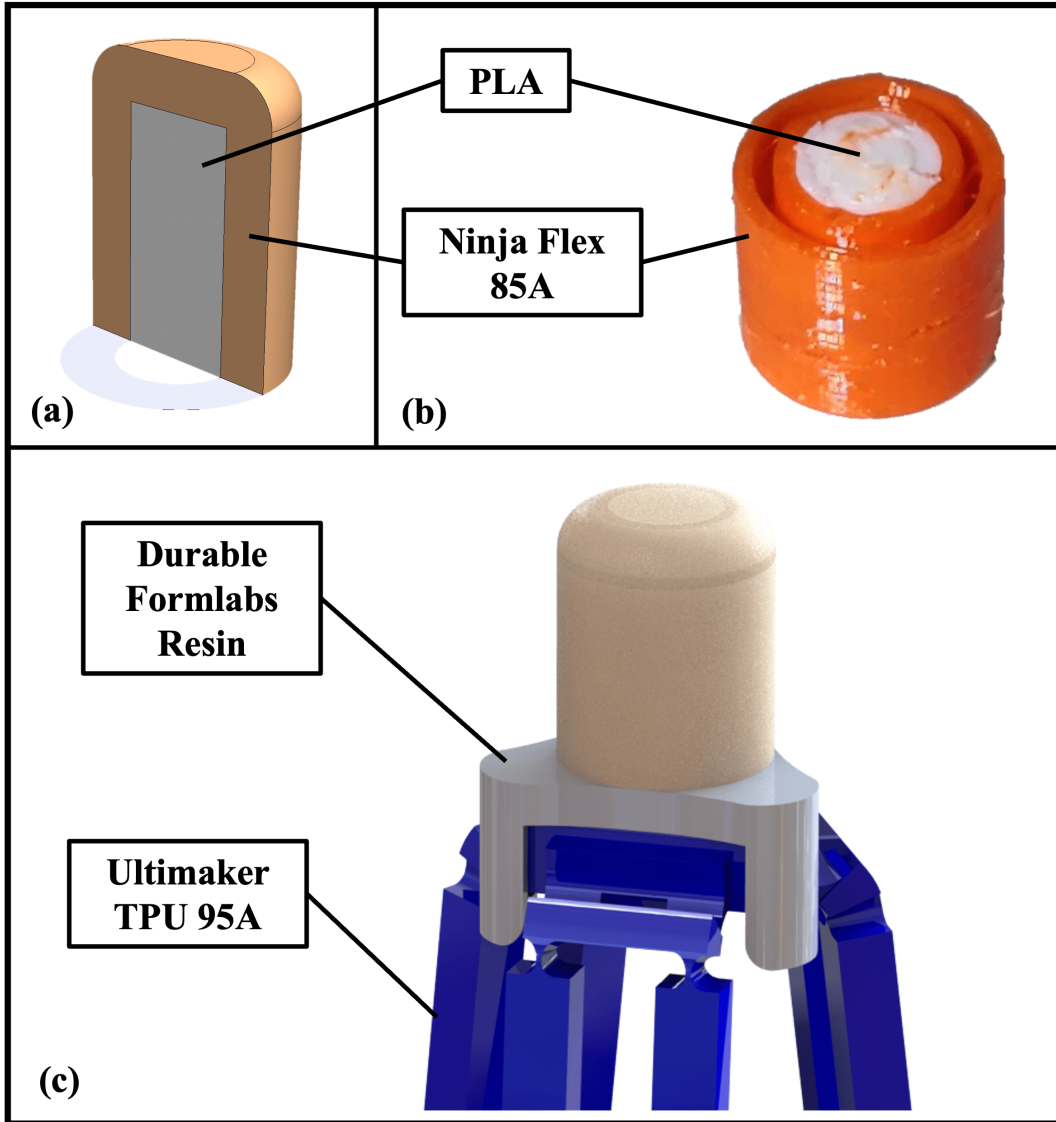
(a) Cross-section view of the fingertip assembly in CAD (b) Cross-section view of 3D printed fingertip shows air pocket created by 0% infill (c) Attachment clip latches into underside of link using catch on end of the 3 prongs.
